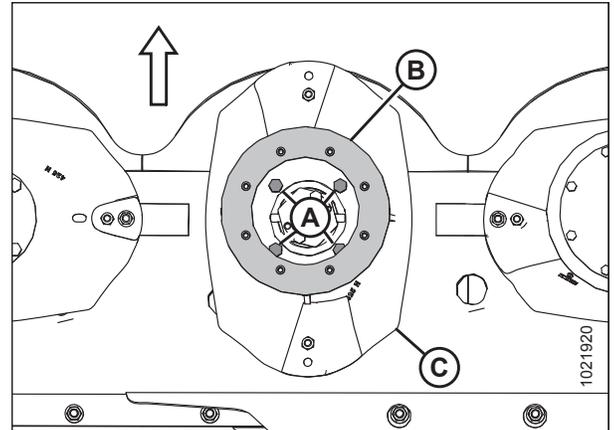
Inboard Right Drum with Cover Removed – View from Above
